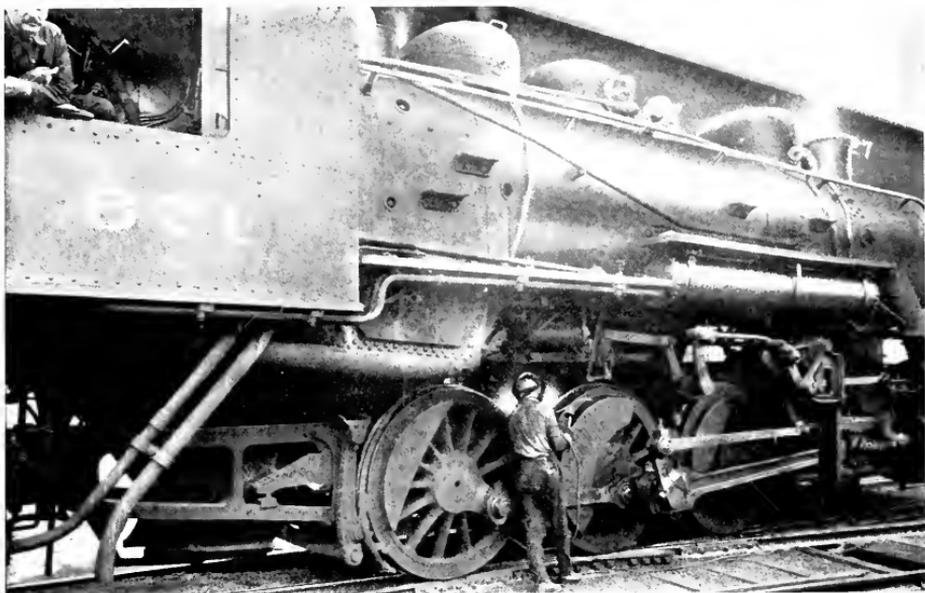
Filling in Worn Flange on Locomotive Driving Wheel
